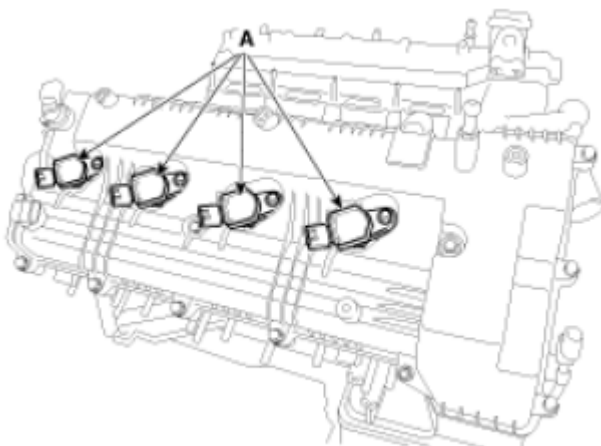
Identifying (BANK 1) Ignition Coils #1, #3, #5, & #7
